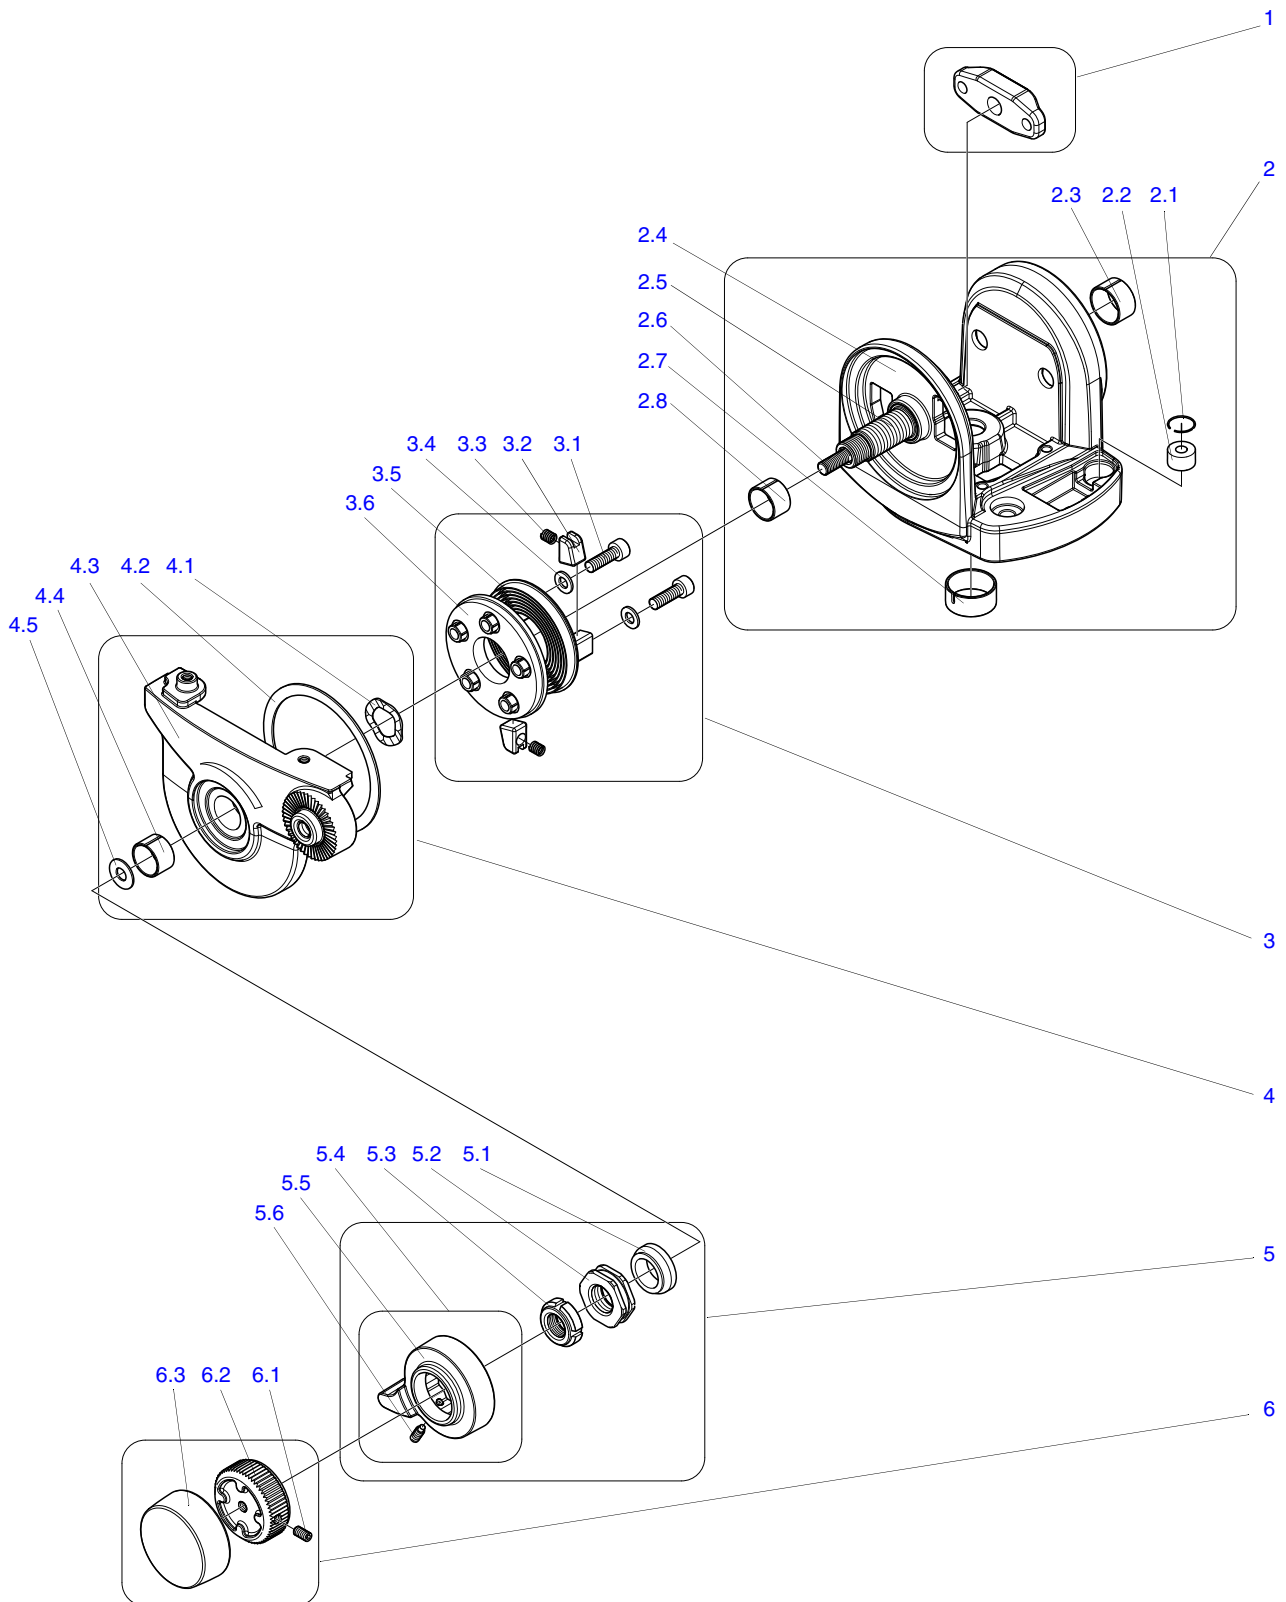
Pro-6^{HDV} Pan and Tilt Head - LH Side Plate and Tilt Brake
